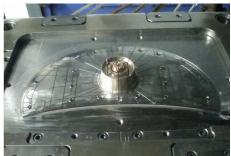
Injection Molding Tool (Image Blue tooth 7 under the CC-BY-SA 3.0 license)
